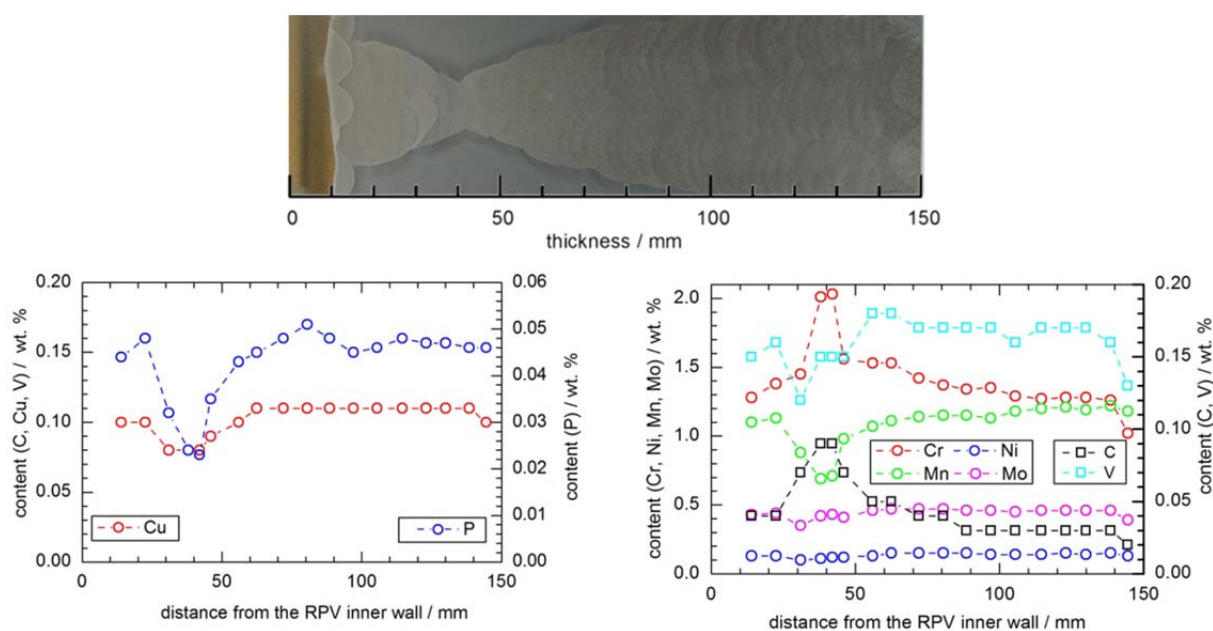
Metallographic section and chemical composition of the multilayer welding seam from the cladded Unit 4 RPV [Valo-2011].
